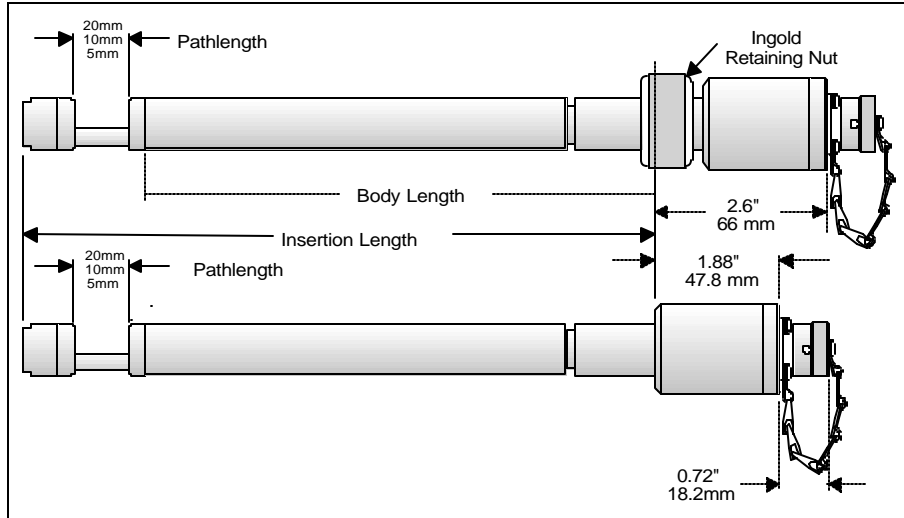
BT65 19mm Std. and Ingold Probe Dimensions
